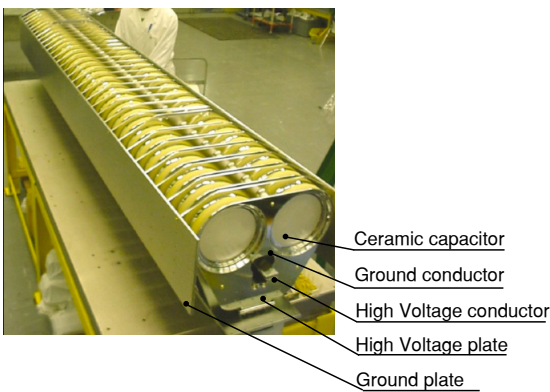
Photograph of the prototype LHC MKI during assembly.
